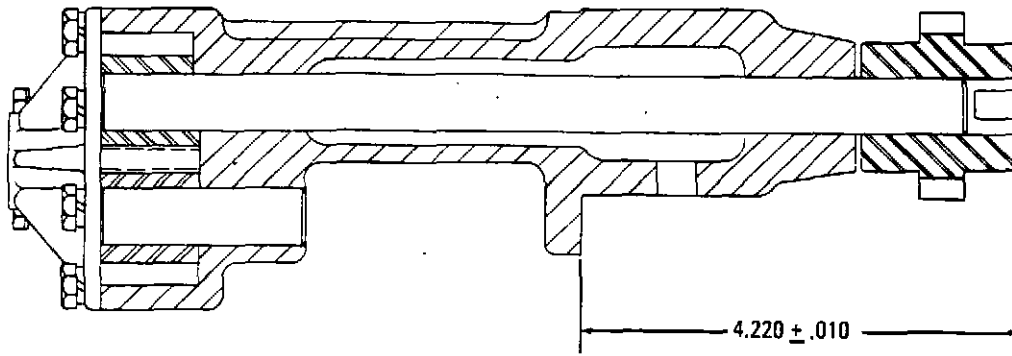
Oil Pump Drive Gear Installation Dimensions
